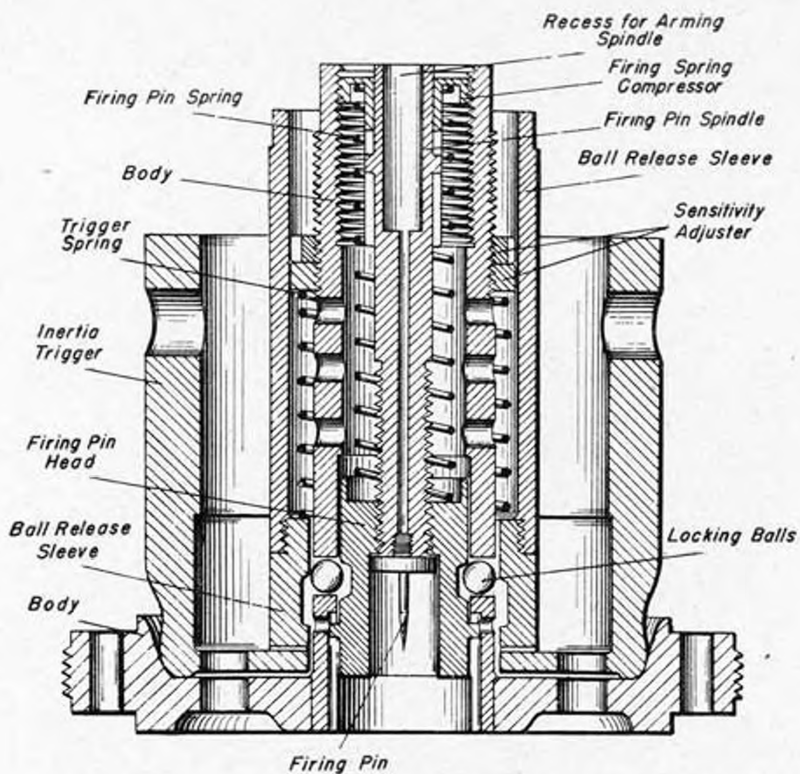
Exploder Type 2 Firing Assembly, Sectional View
